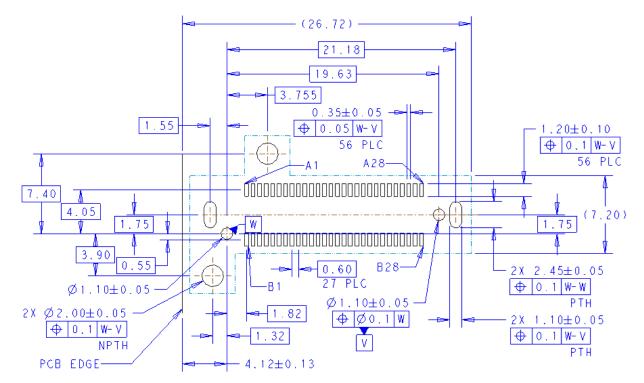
1C RIGHT ANGLE ORTHOGONAL SMT CONNECTOR FOOTPRINT
